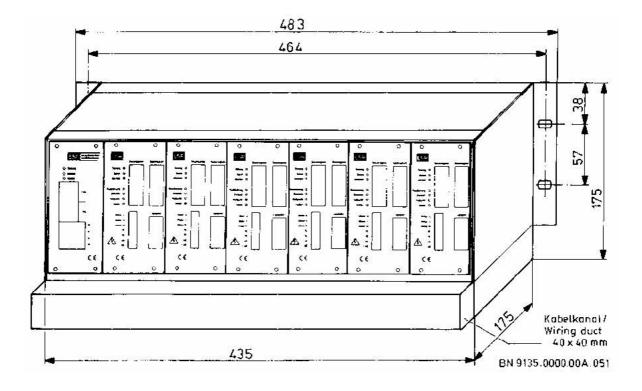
Multi-axis servo amplifier for for mounting on the control cabinet mounting plate, 84 units wide, 4 height units high including fan unit, dimensions (mm)
